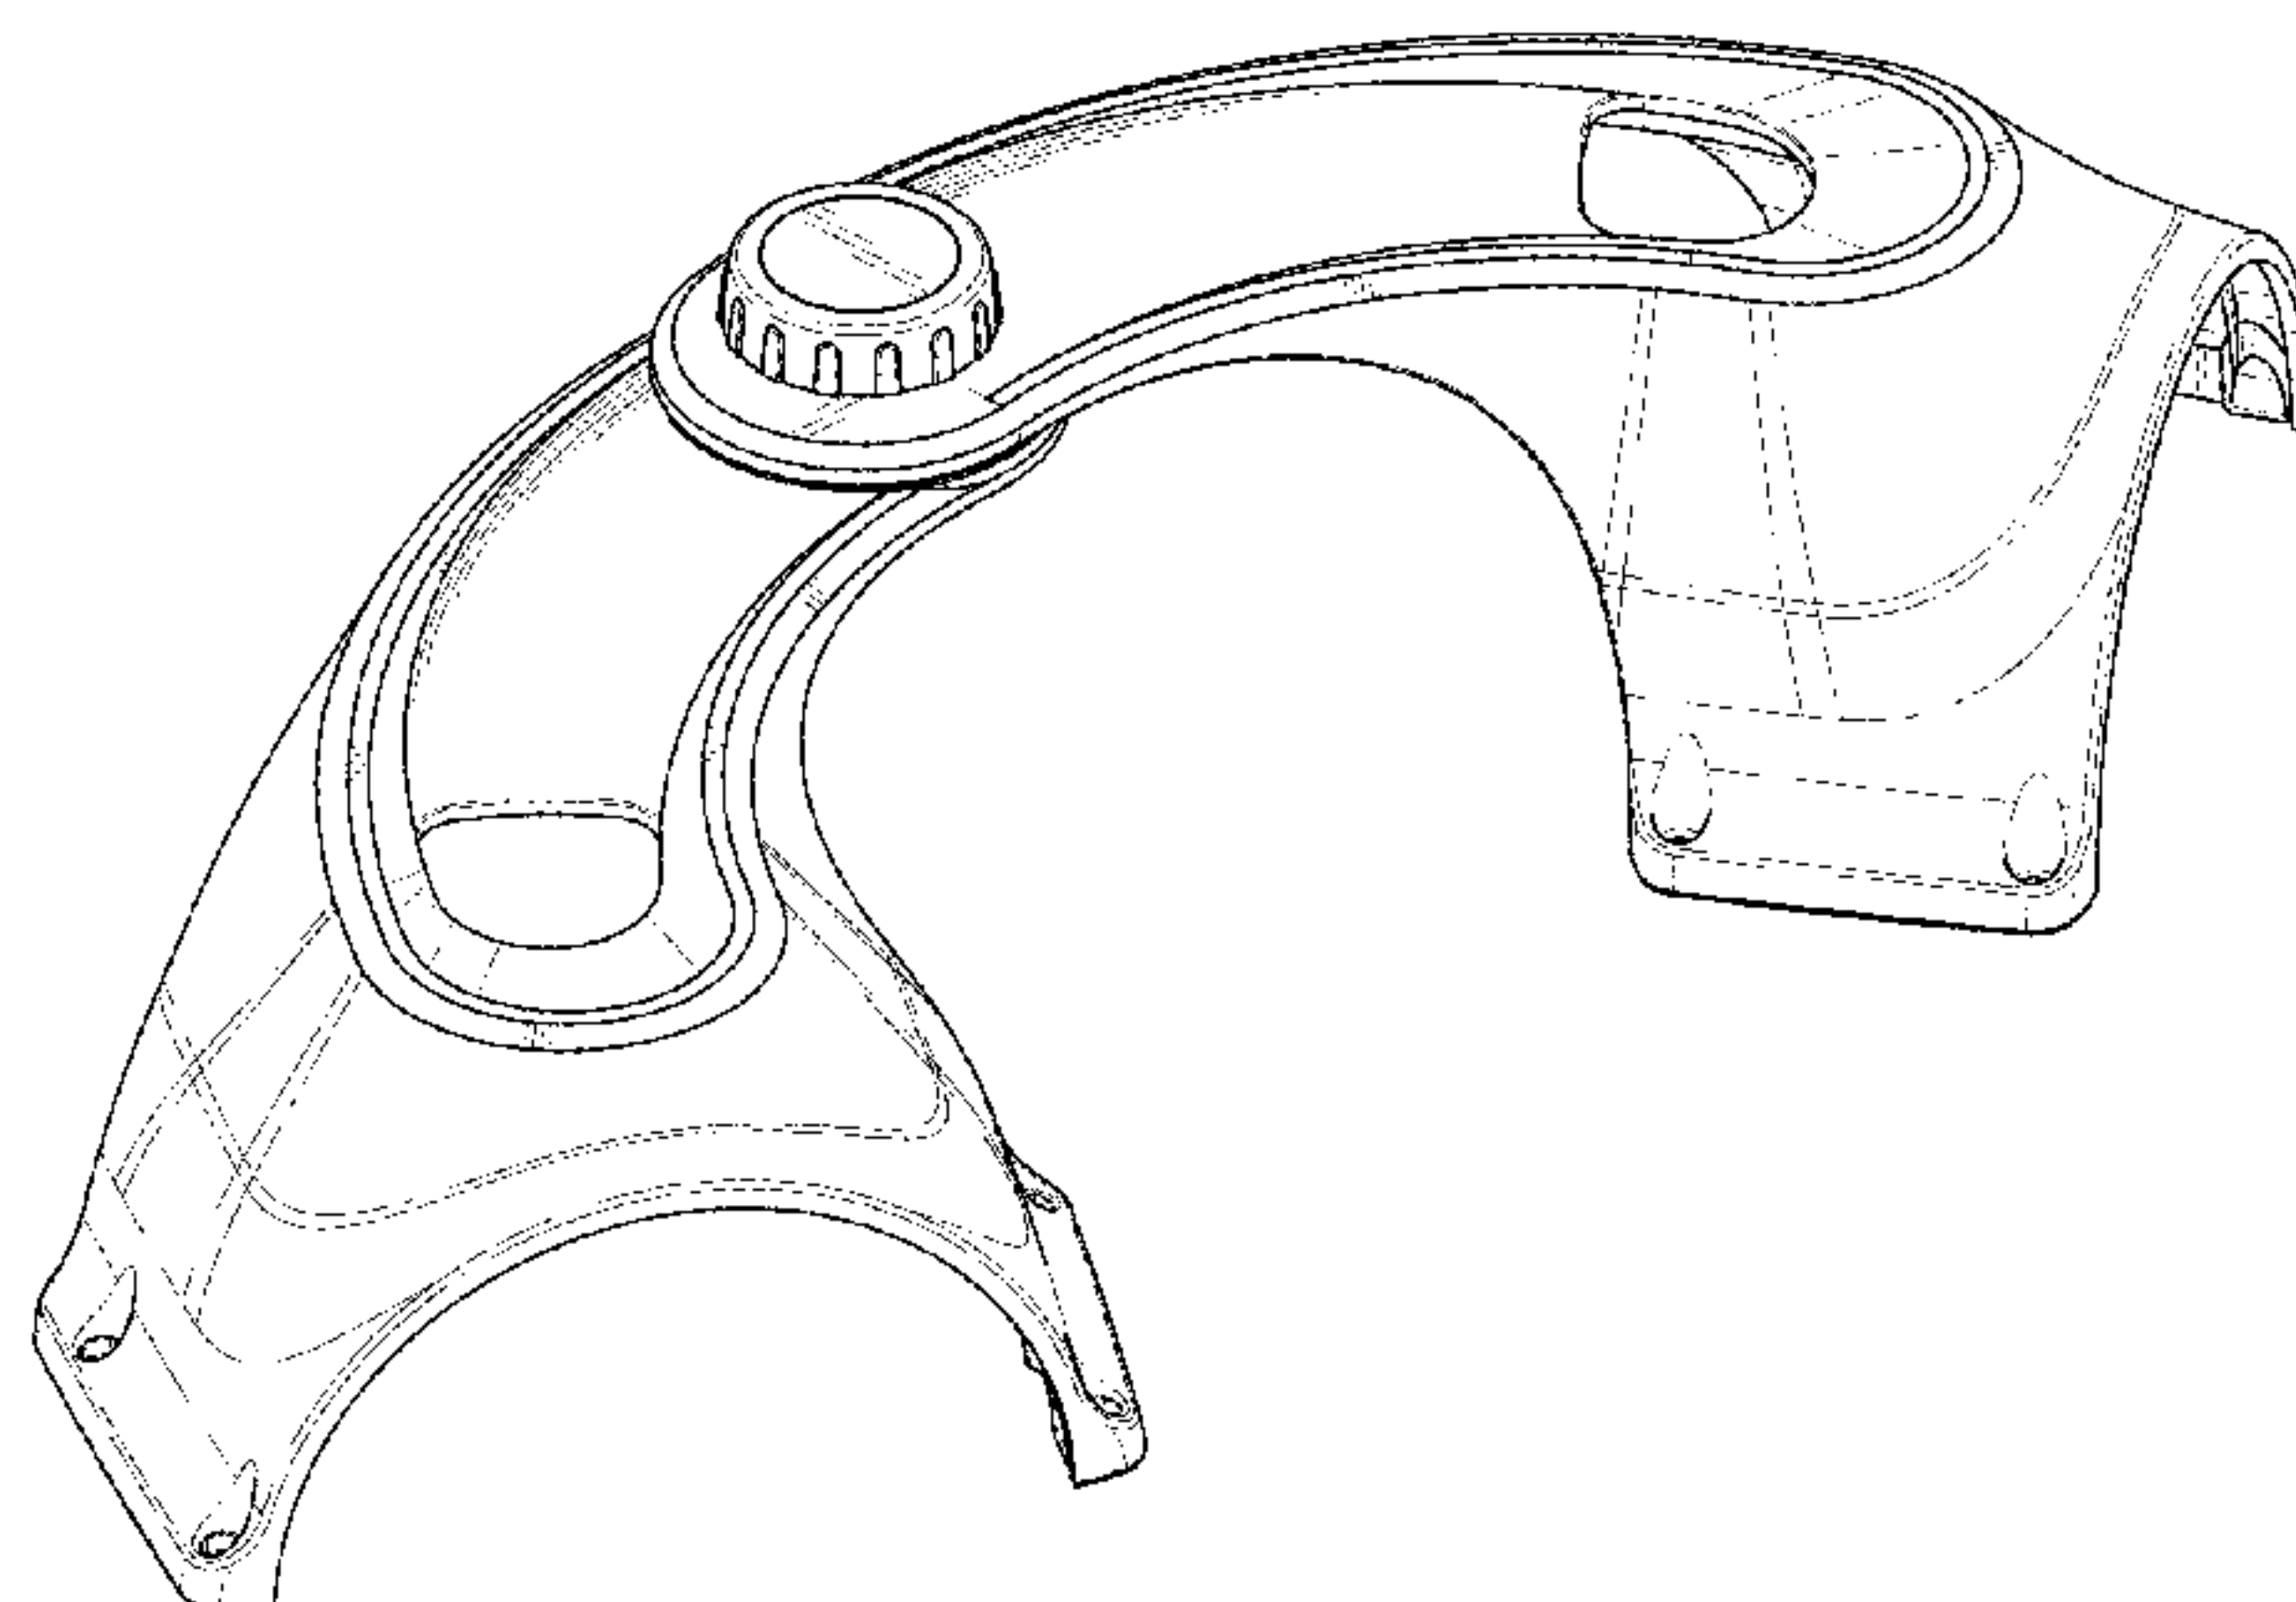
is a top perspective view of the second wing component of the lockable friction joint assembly, shown separate for ease of illustration.
